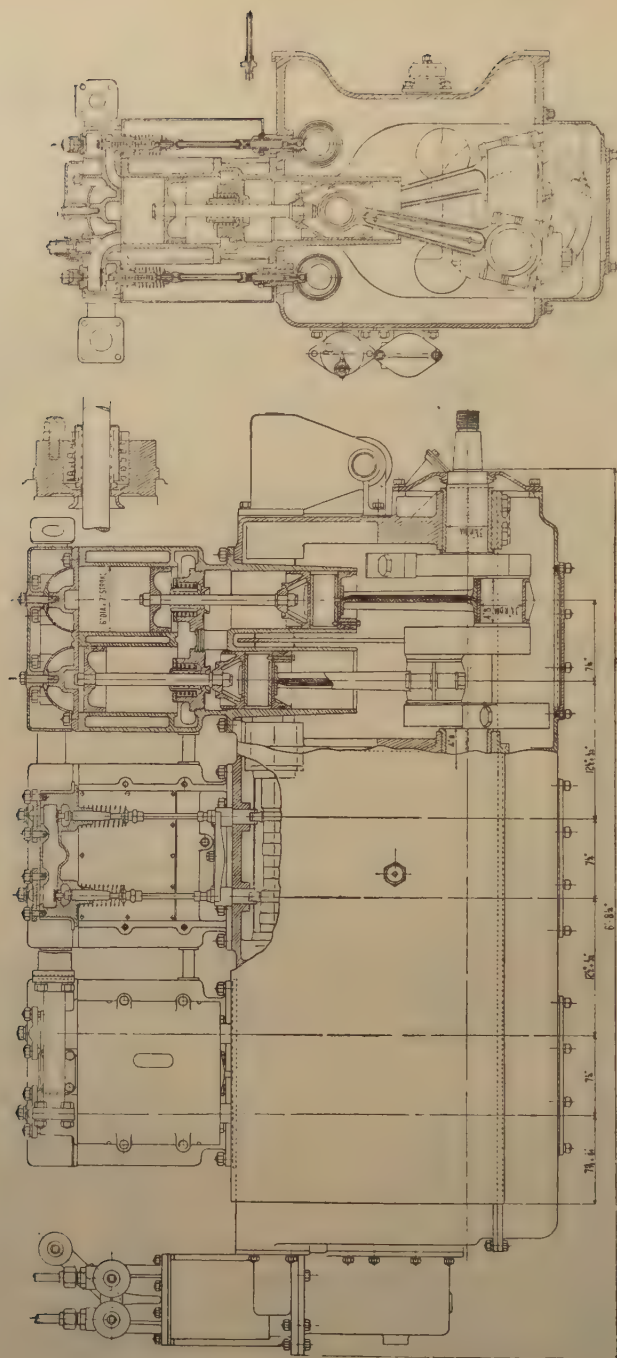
Six-cylinder single acting engine for Sentinel Cammell steam rail car — gear driven.
